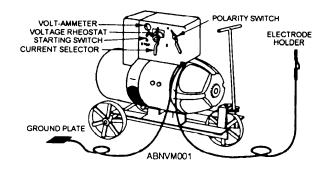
Variable-voltage dc generator welding unit (dual-control type).
